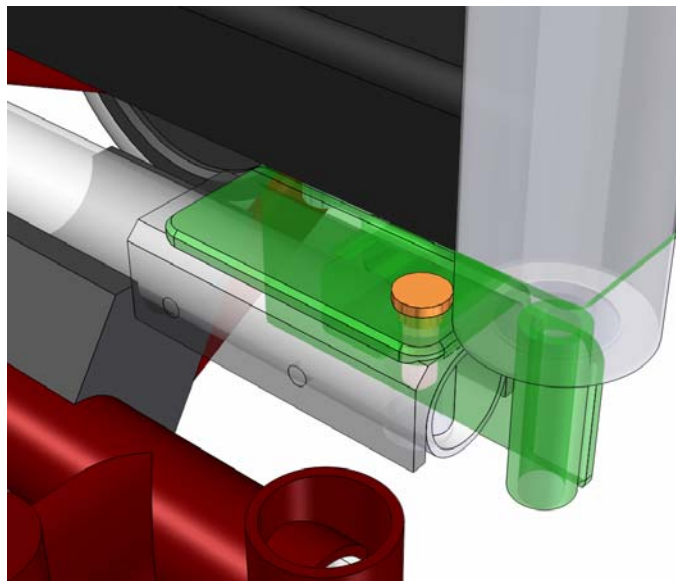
Appropriately fitting seat plate aligning pin in the holes
